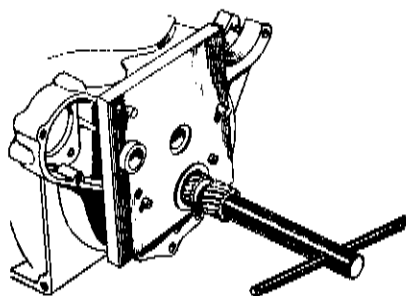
The Reaming Jig. Service Tool 61-3275 for A7, 61-3281 for A10 and A7 after eng. AA7-101.
